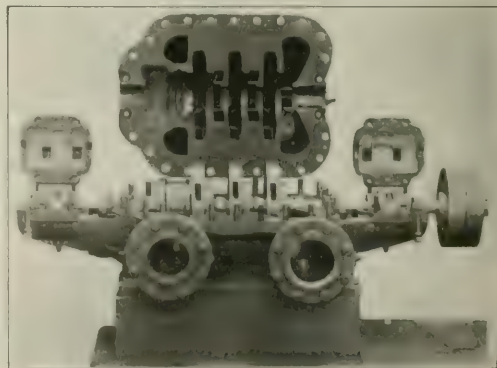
THREE-STAGE TYPE "BT" BOILER FEED PUMP, SHOWING INTERNAL CONSTRUCTION
